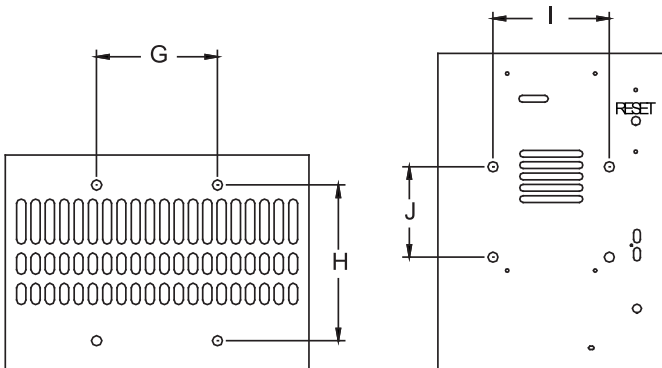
THREADED ROD (3/8 - 16) ATTACHMENT POINT DIMENSIONS
